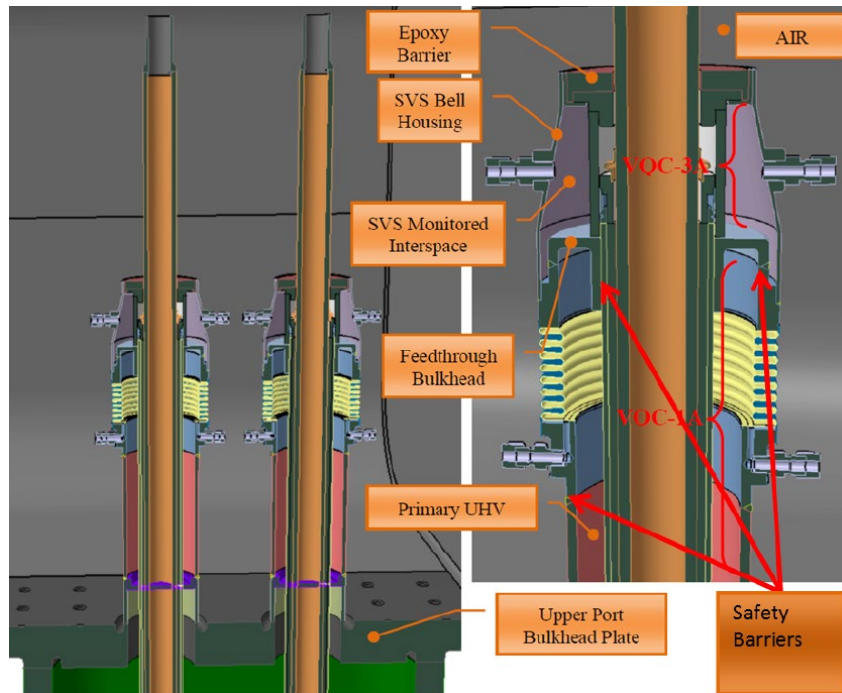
The IVC feedthrough region in the ports. The primary vacuum boundaries are the welding of the Vacuum Tube to the Bulkhead plate, the welding of the FT Bulkhead to Bell housing and the brazing of the conductor jacket to the FT Bulkhead.
